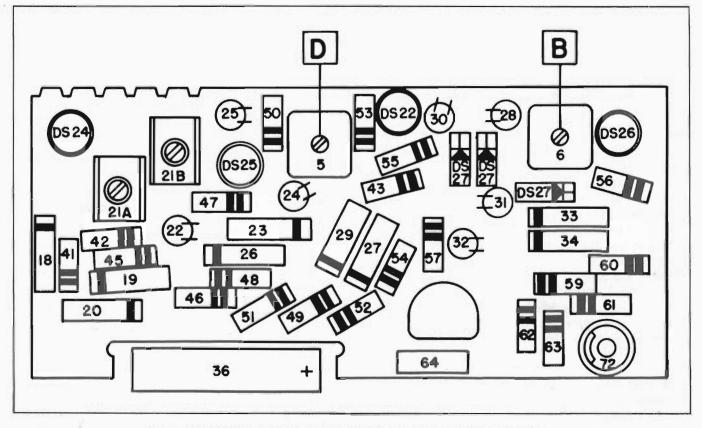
PARTS LAYOUT ON CIRCUIT BOARD - 985432 - RADIO
